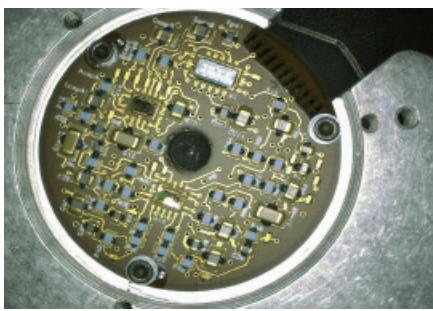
Chip-on-board motor driver assembly developed for the extreme temperature cycling of Mars [20].
